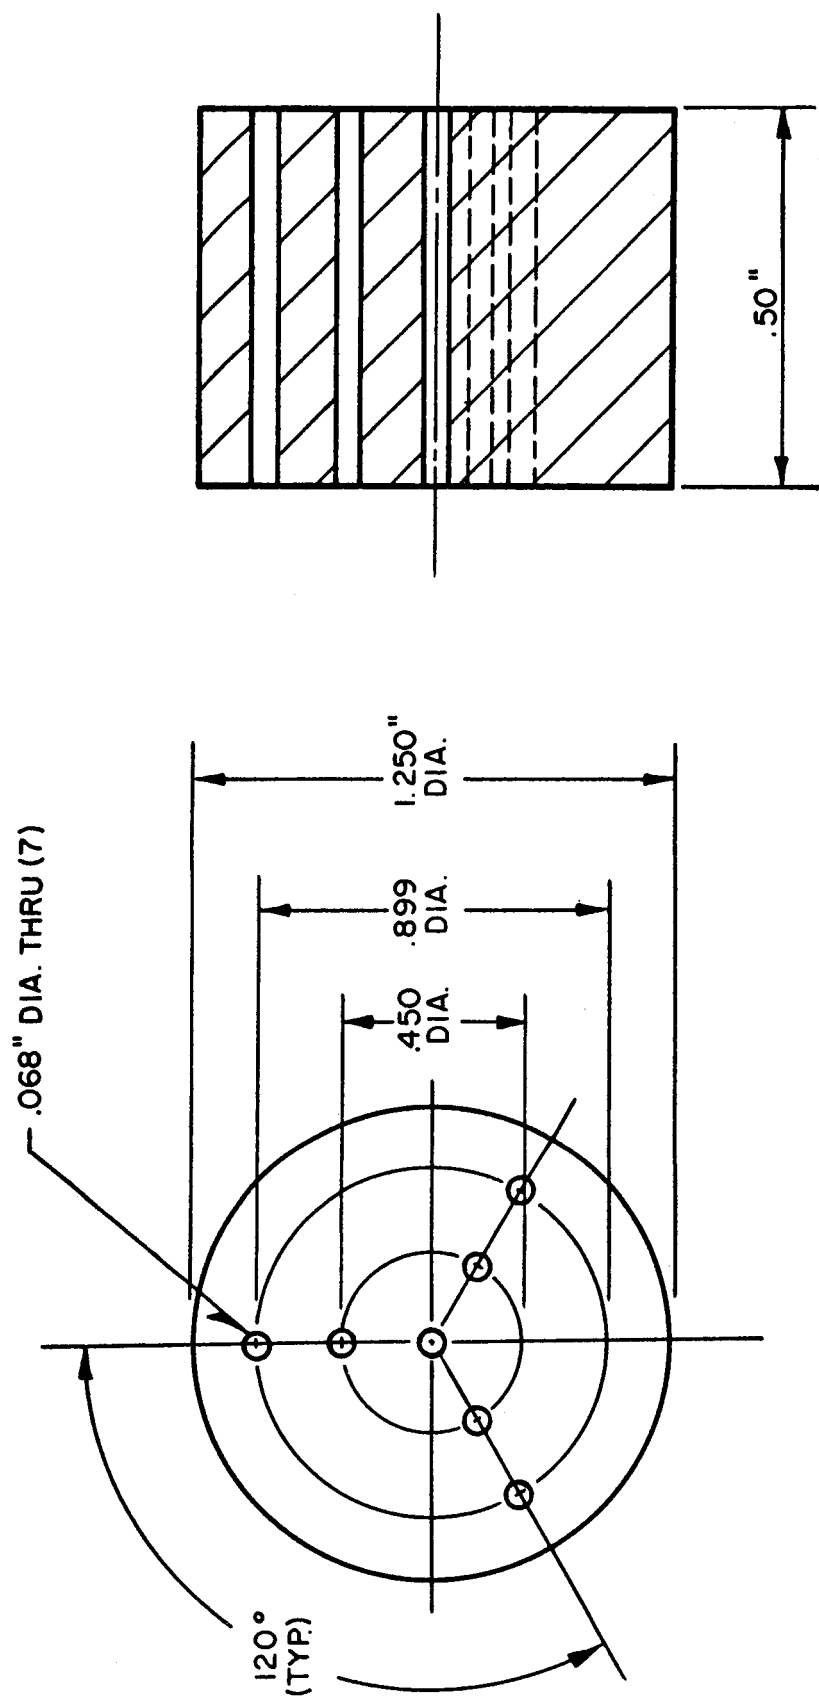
PELLET AND THERMOCOUPLE DIMENSIONS.
